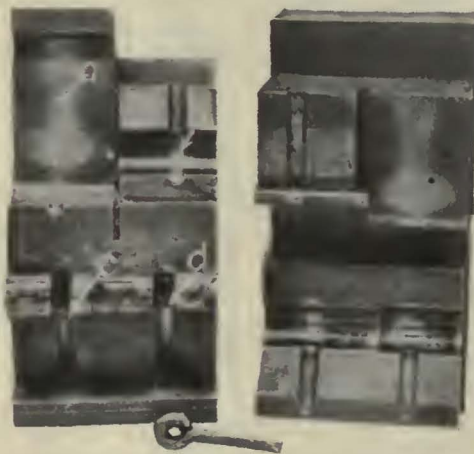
The Piece Shown at the Bottom is Formed Cold from 5/16-in. Round Stock in Four Operations
